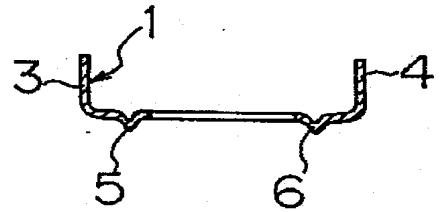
is an exploded perspective view of a brush holder related to the present Device; Figure 2 is a view on arrow taken along a line A-A of the brush arm shown in Figure 1; Figure 3 is a vertical cross-sectional view after assembling a brush; Figure 4 is an exploded perspective view of another embodiment of the brush holder related to the present Device; Figure 5 is a vertical cross-sectional view after assembling the brush of Figure 4; and Figures 6 to 8 show another embodiment, the individual figures corresponding to Figures 1 to 3, respectively.
